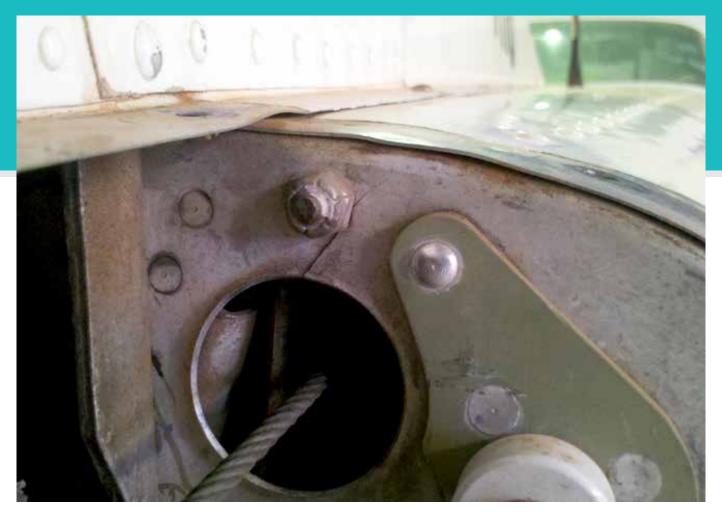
(above) Fatigue cracks frequently initiate at holes.
